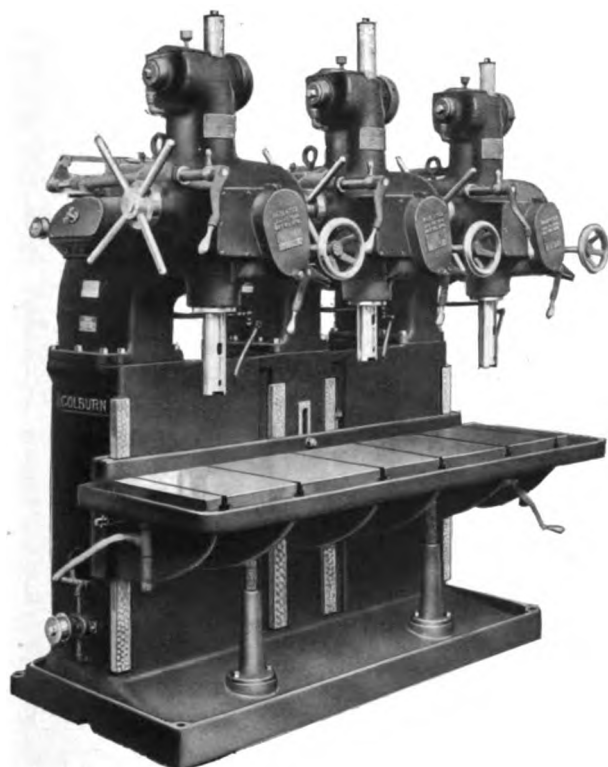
No. 4 Colburn 3-Spindle Gang Drill
